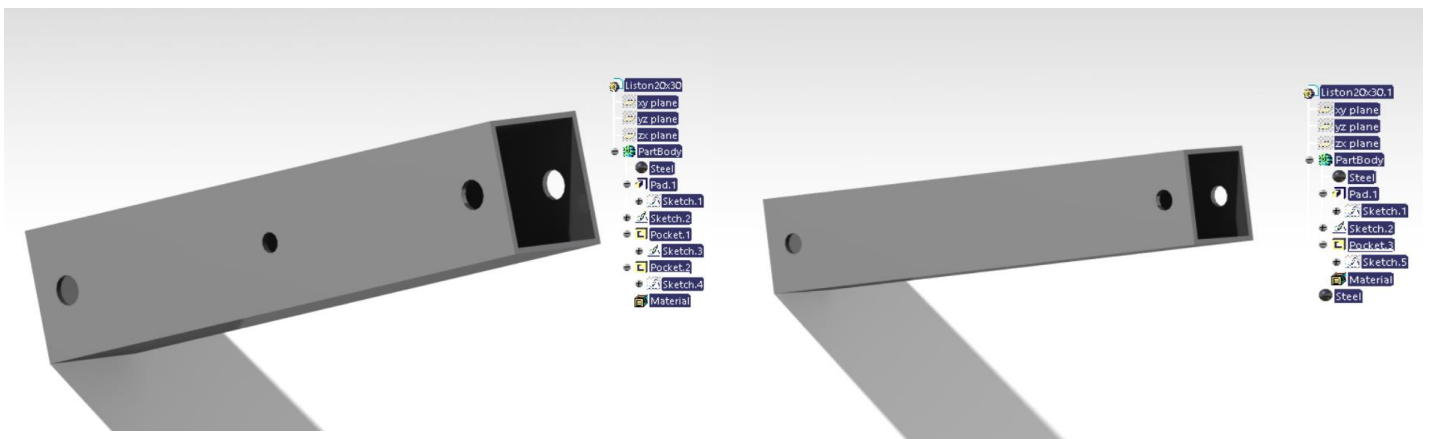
SECTION 49x57 (LEFT) AND SECTION 38x49 (RIGHT)
